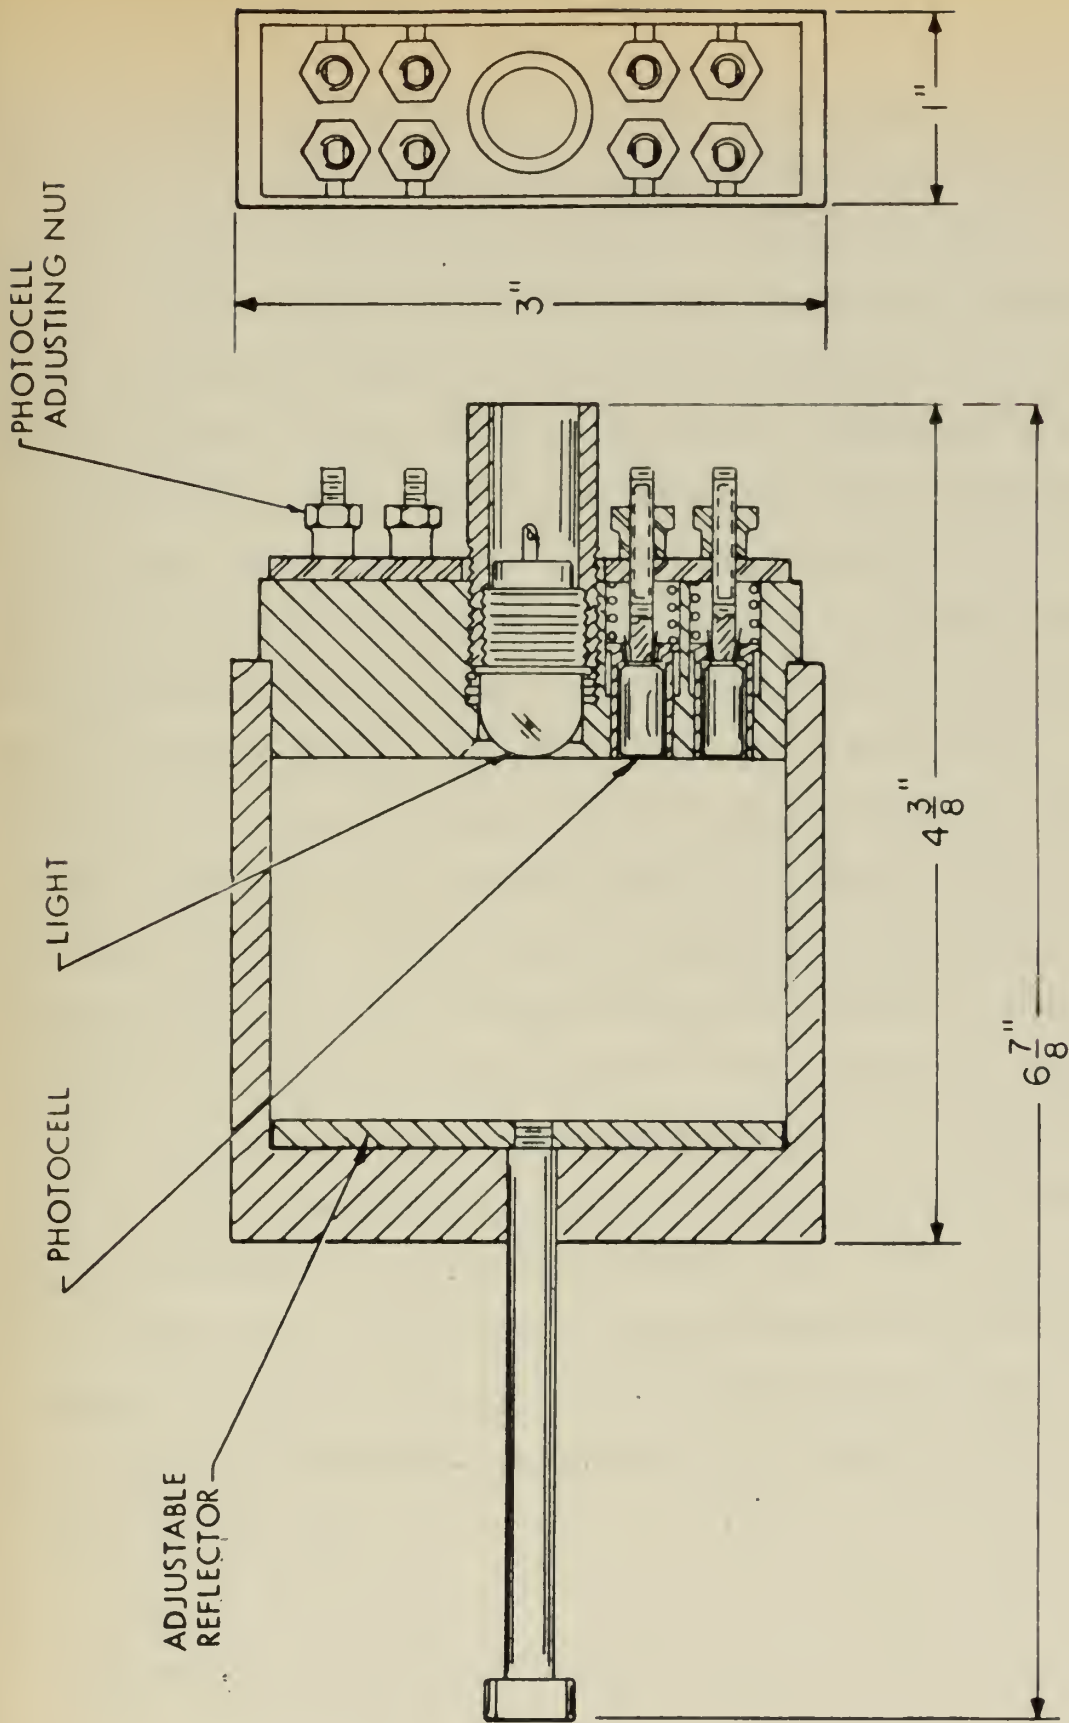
SECTIONAL VIEW OF PHOTOCELL-LAMP PACKAGE
